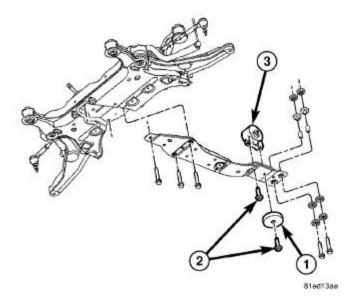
Front Mount Vertical Bolts Courtesy of CHRYSLER LLC
